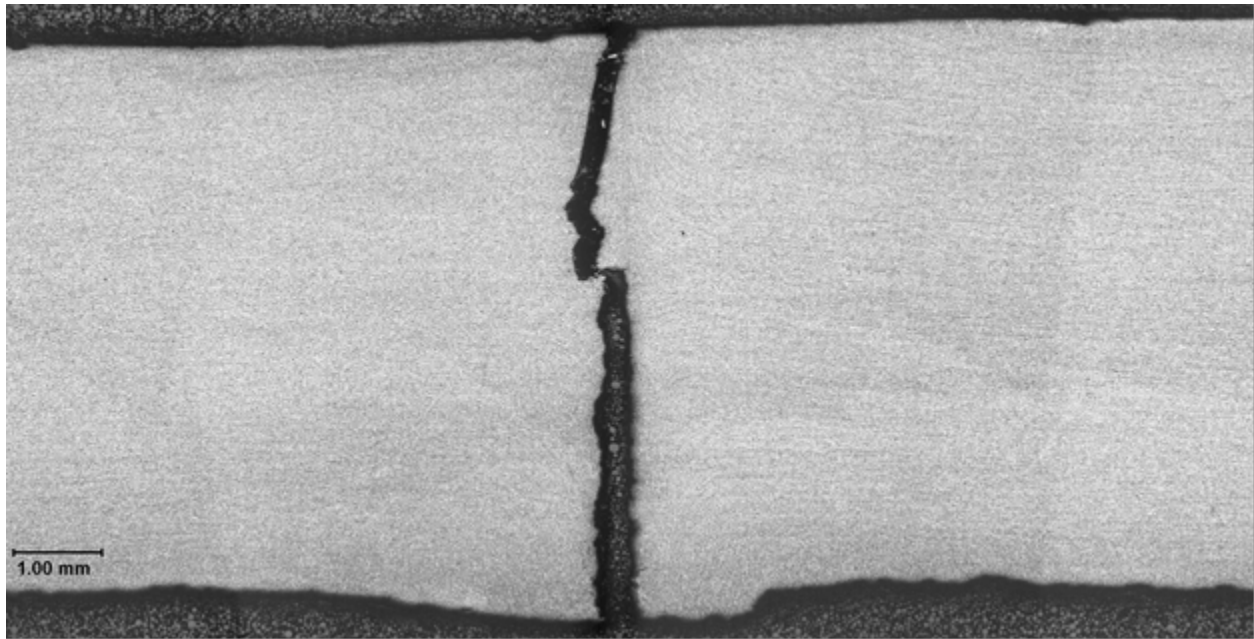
Cross Section of Hook Crack Shown in Figure 26 (Note that the end of the hook crack was close to the bondline and that the fracture jumped into the bondline.)
